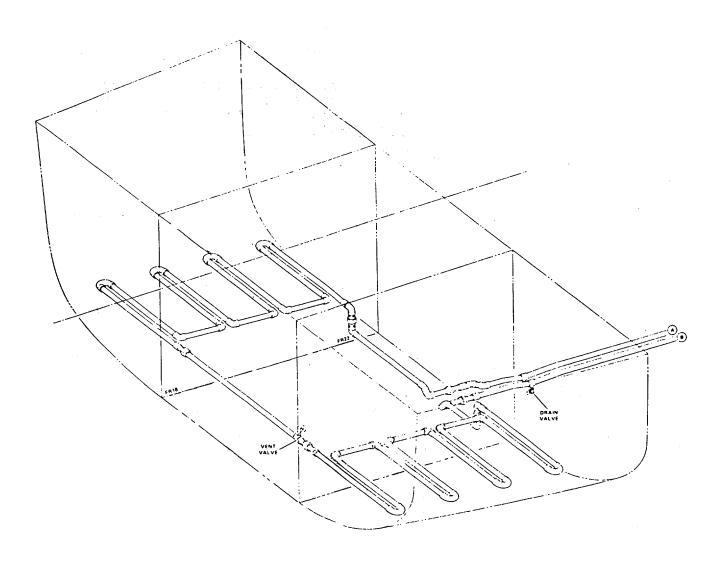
Engine Cooling System-Diesel Generator Engine
